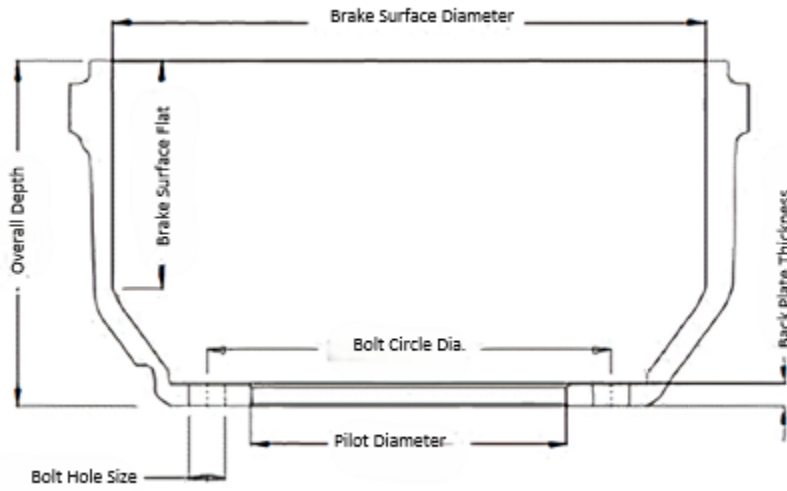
Brake drum and disc hub form a drum-hub assembly
